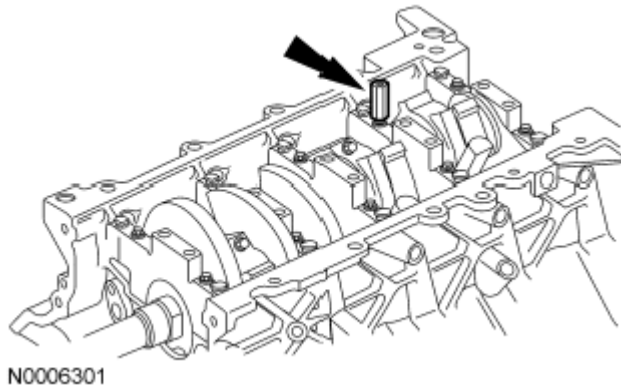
Locating Oil Pump Screen And Pickup Tube Spacer
